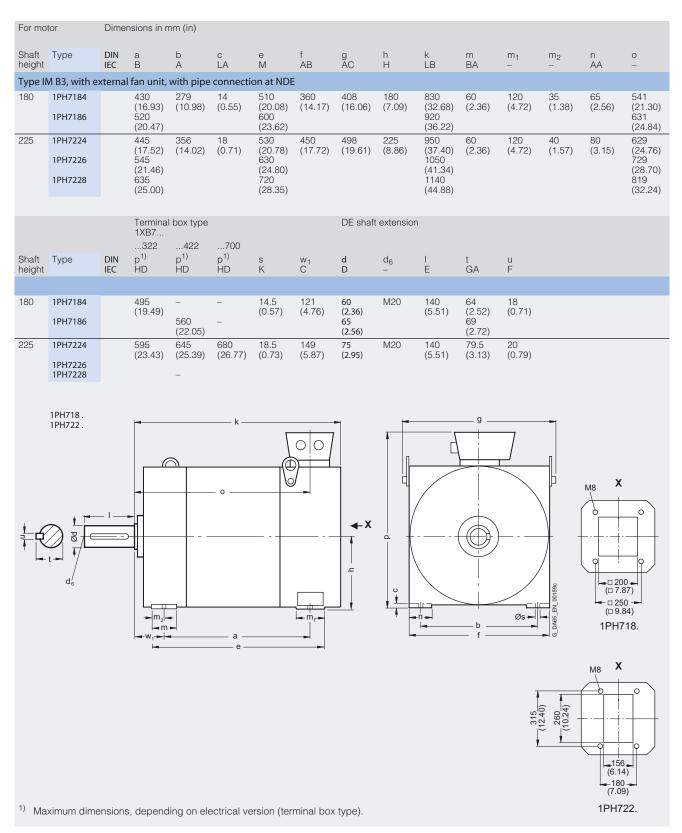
1PH7, type of construction IM B3, forced ventilation, with pipe connection, NDE
